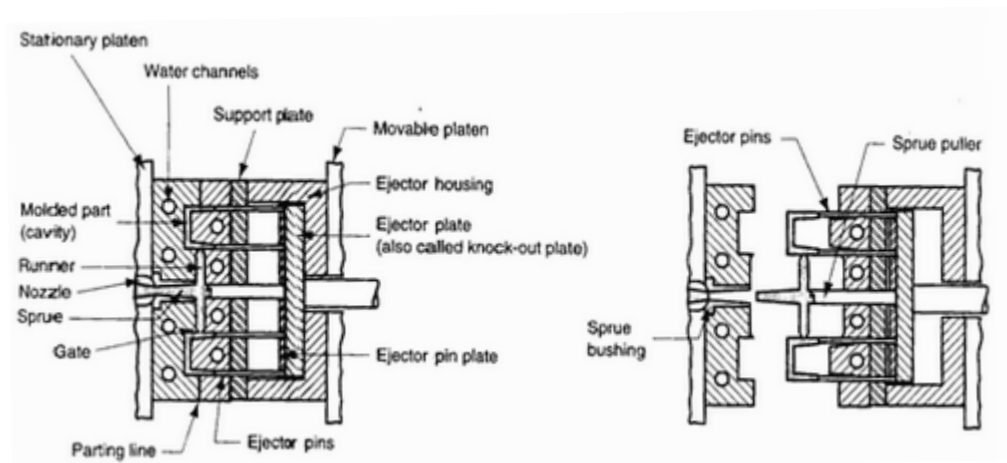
Two-plate mould (<http://www.sinotech.com/injectionMolded.html>)
